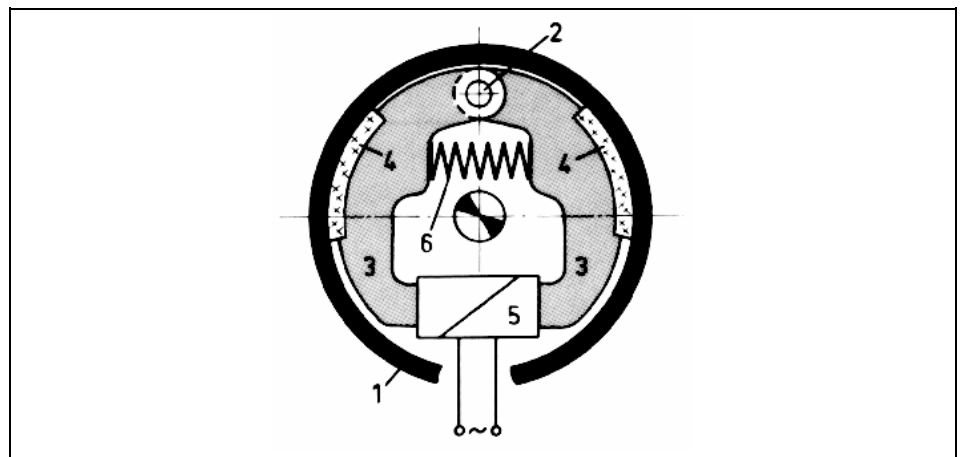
Principle of a shoe spring-loaded brake with A.C. solenoid release; type series 75 (BINDER)
